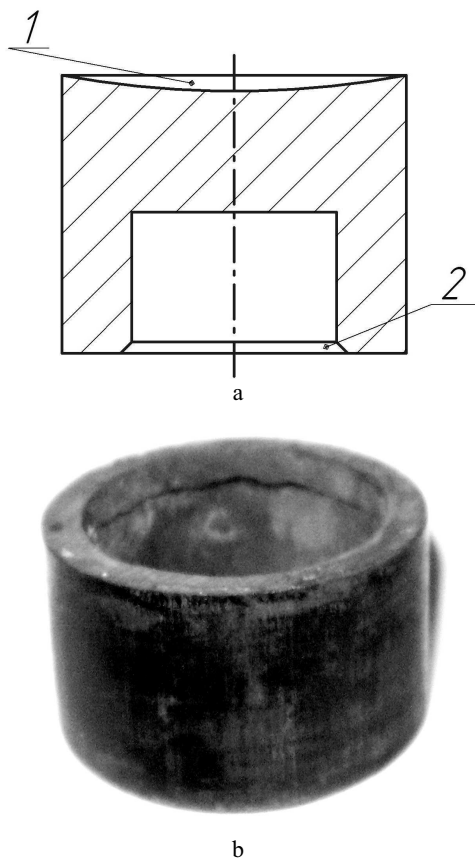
Shape defects: the sketch (a): 1 – is the tip, 2 – is the flow-through flaw, photo (b)
